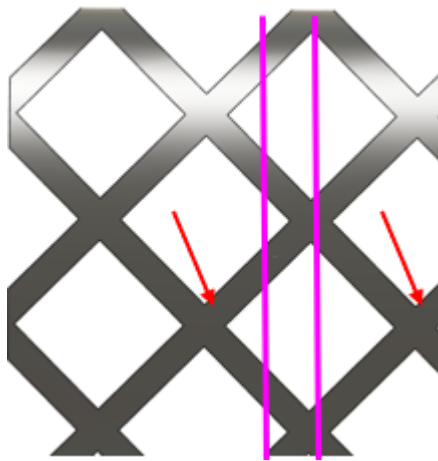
VERTICAL VIEW WD1 SUBSECTION, CRACK PROPAGATION FAILURE POINTS HIGHLIGHTED WITH RED ARROWS. CROSS SECTIONS HIGHLIGHTED WITH PINK LINES.
